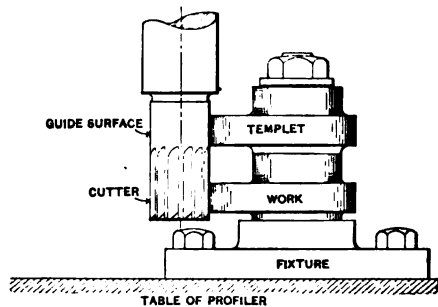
The Simplest and Stiffest Arrangement for Cam Cutting
